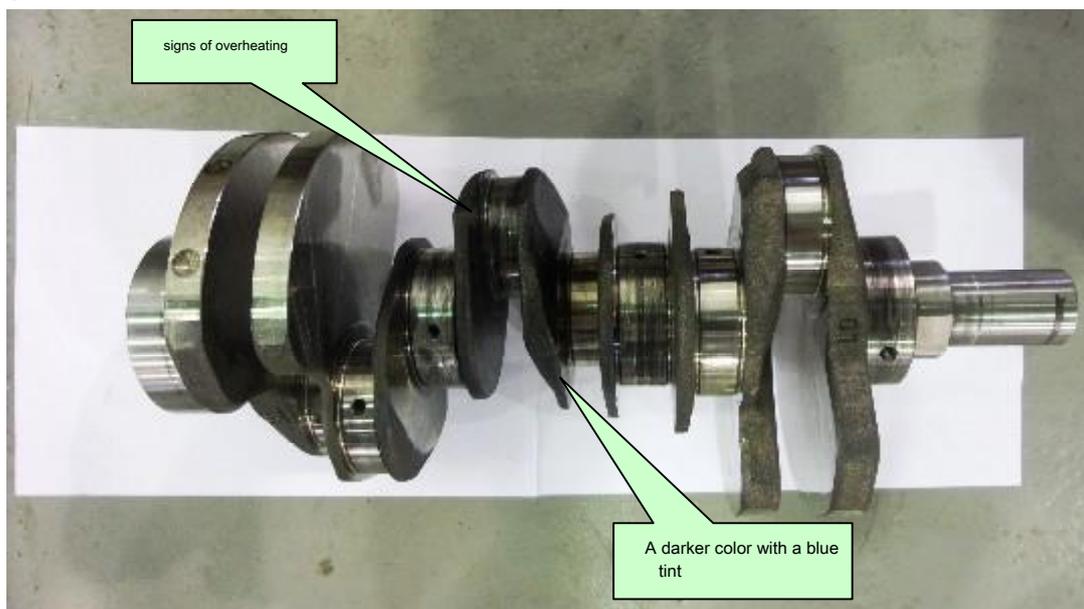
Visual inspection of the test vehicle engine crankshaft LAND ROVER DISCOVERY 4, VIN
